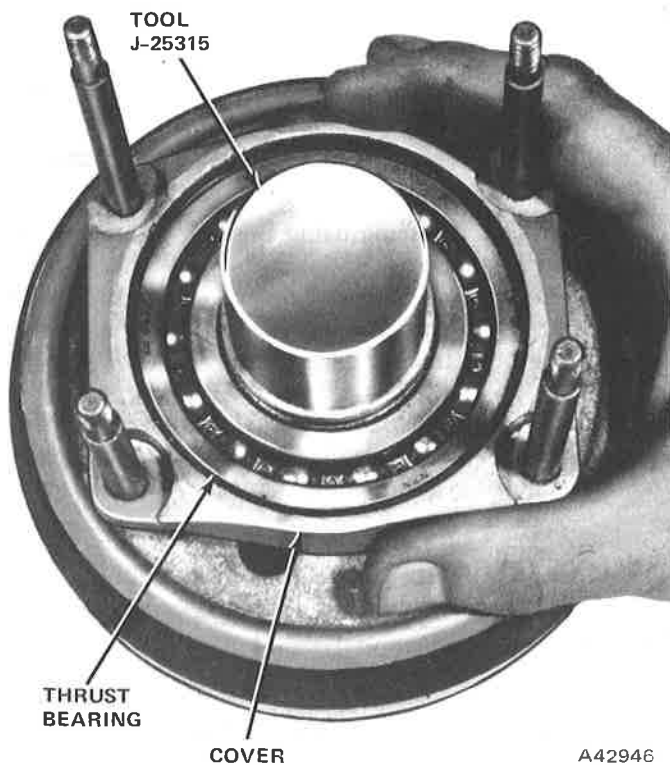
Driving Clutch Hub from Bearing and Cover
